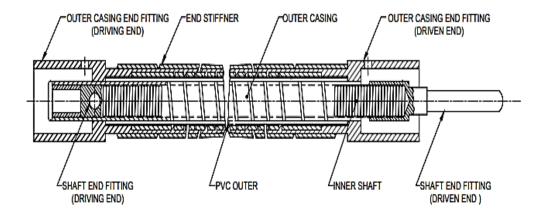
FLEXIBLE SHAFT ASSEMBLY
